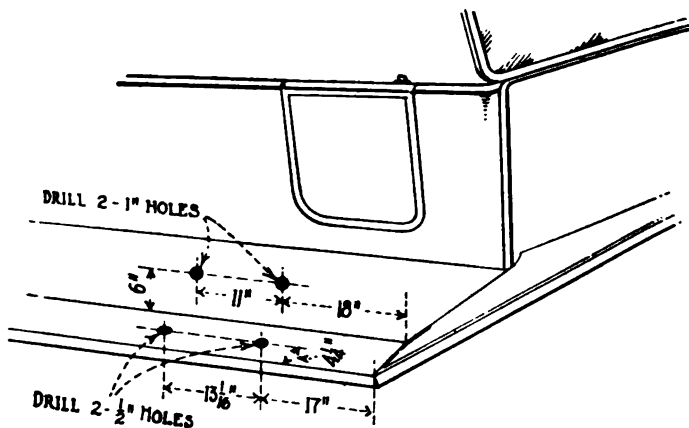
Location of holes in running board and splash plate for battery mounting bolts and cables
